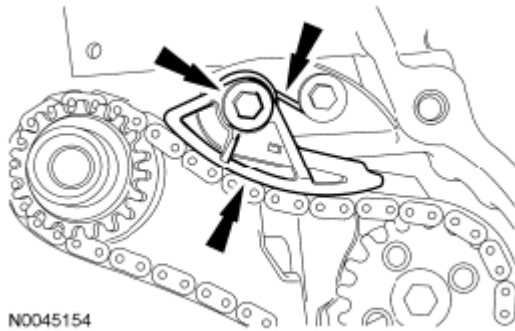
Locating Oil Pump Drive Chain Tensioner, Bolt & Tensioner Spring
